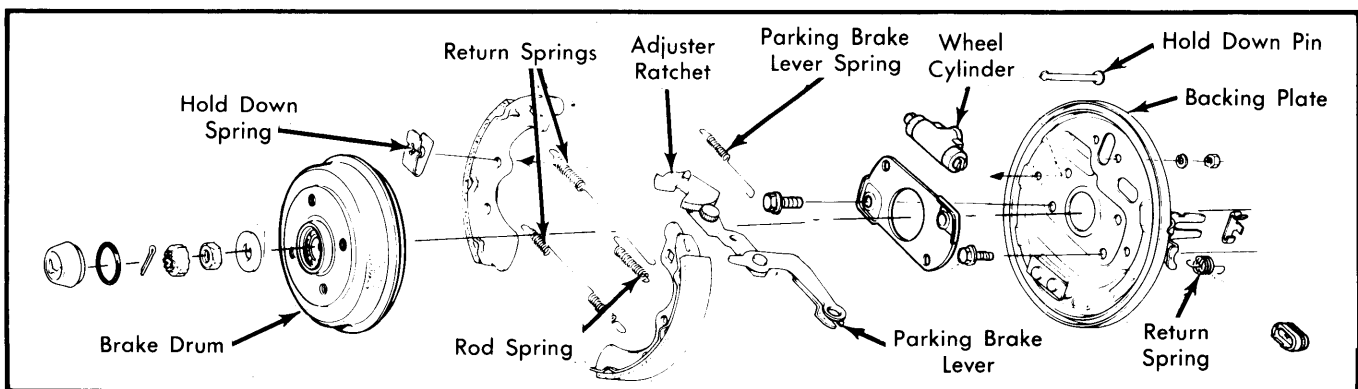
Exploded View of Civic and Prelude Rear Brake
